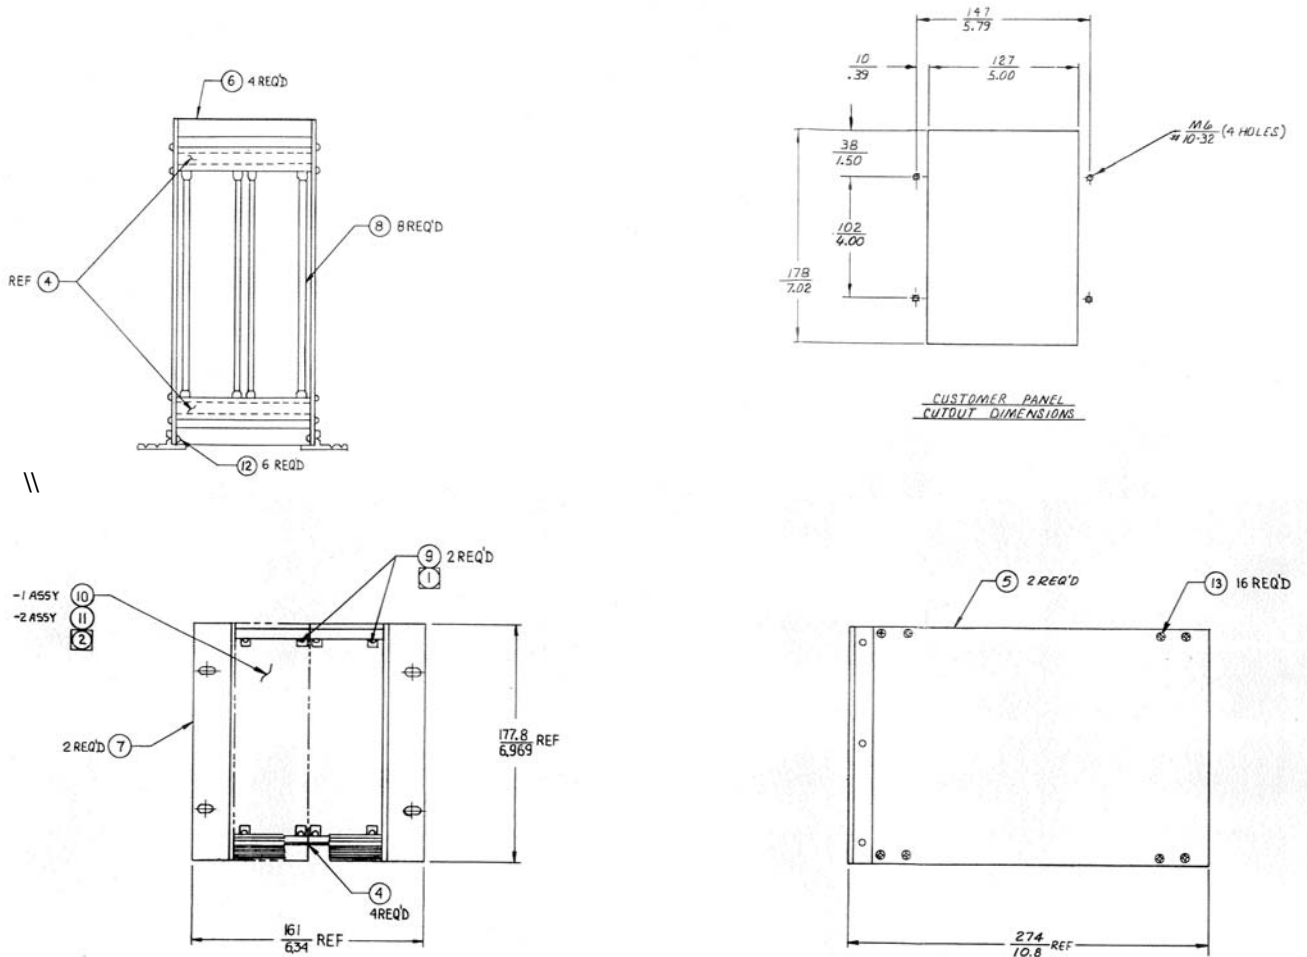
Panel Assembly, Panel Mount – 98, Ref: 10199C
